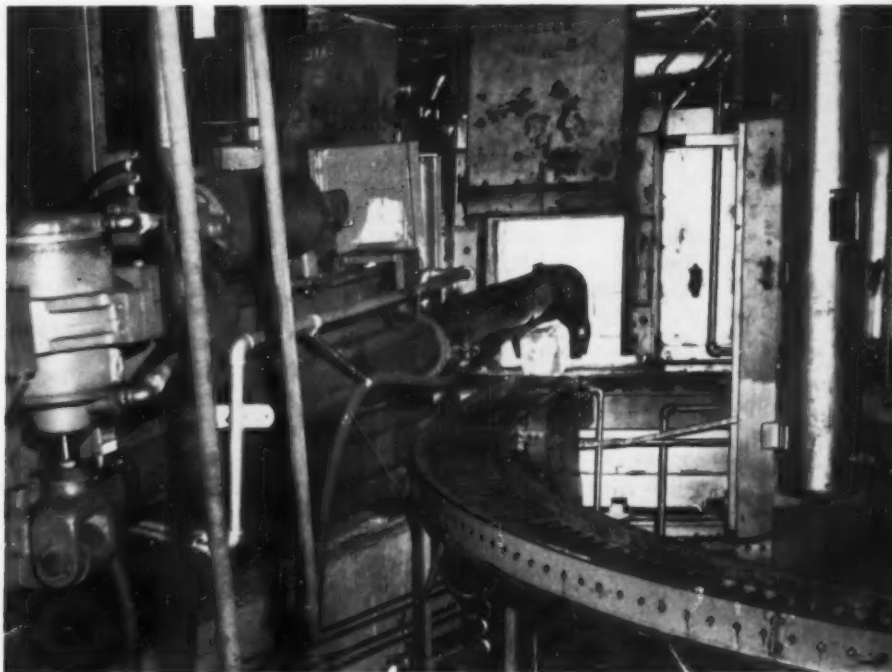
Heated Billet Is Removed From Furnace and Starts on Its Way to Forging Press
